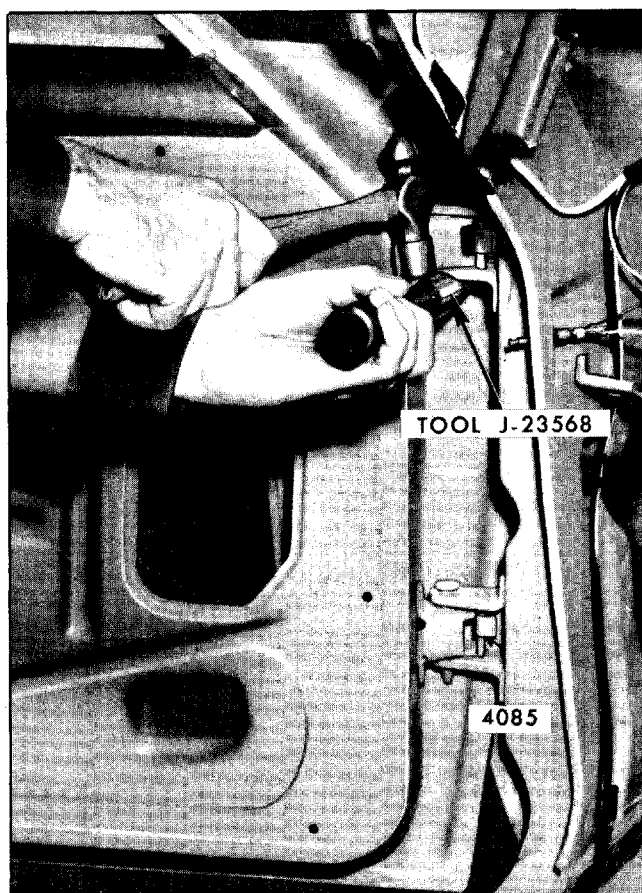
Door Hinge Pin Removal - "H" Styles
